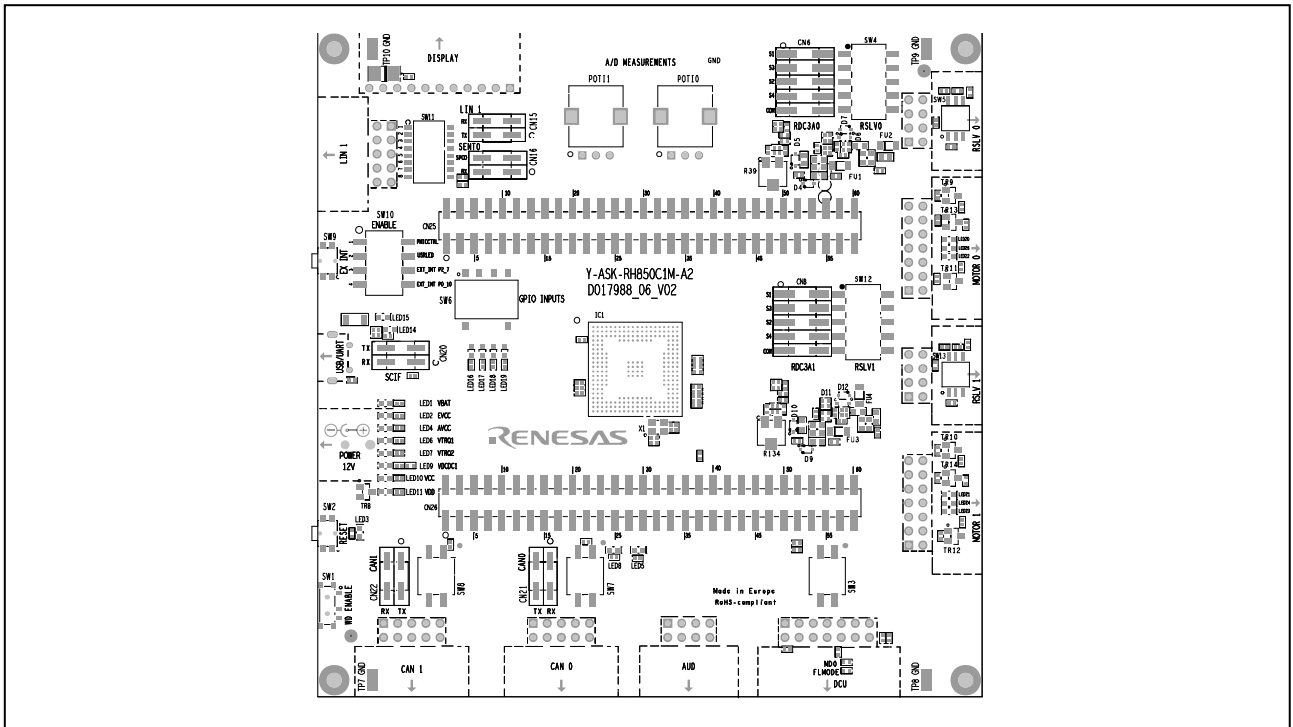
Starter kit board top view, board revision D017988\_06\_V02
